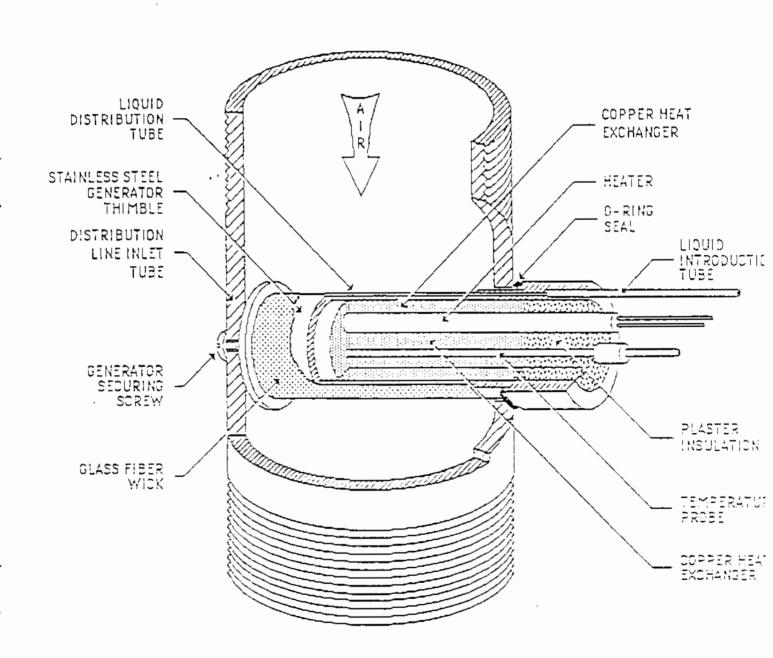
Cutaway Drawing of the Liquid Vapor Generator
